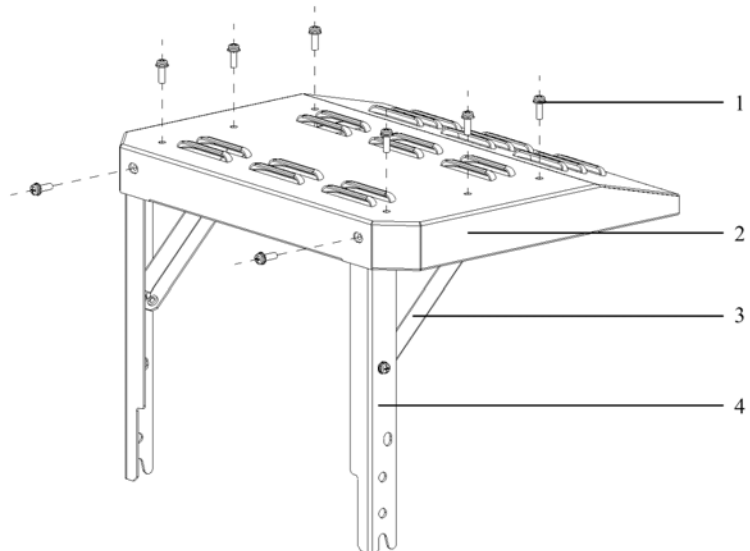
ASSEMBLING PROTECTIVE SHIELD (1)
